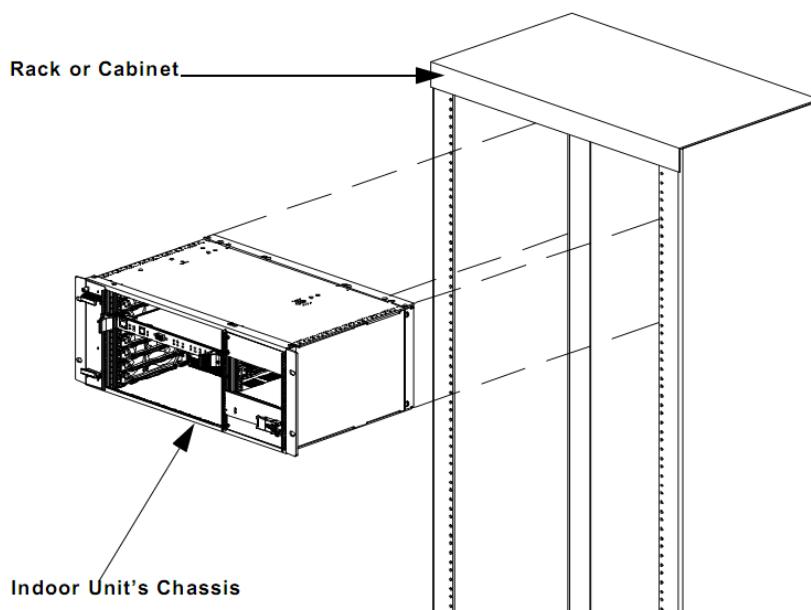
Inserting the Indoor Unit Chassis in the Cabinet
